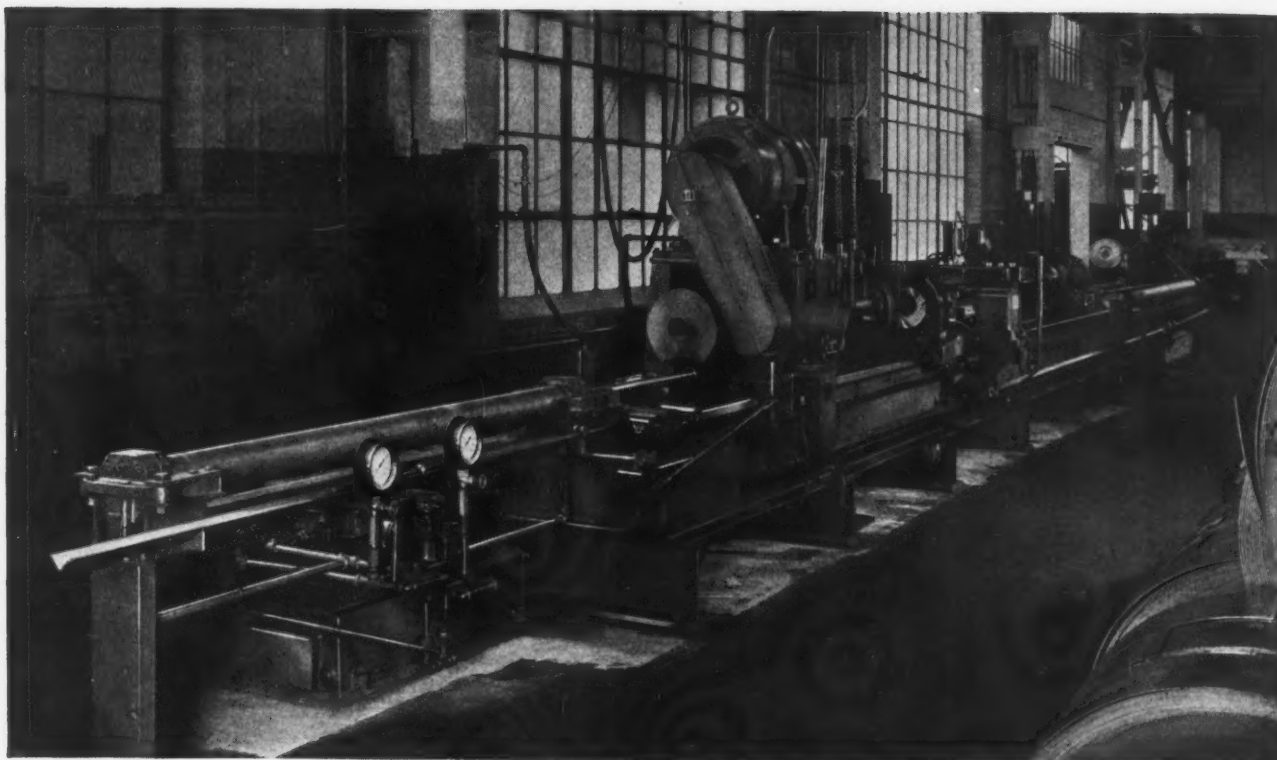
General View of the Machine Used in Shaping Tubes by the Dewey Process, Hydraulic Equipment being Provided at Both Ends of the Bed for Feeding and Traversing the Headstock and Roller Carriage
